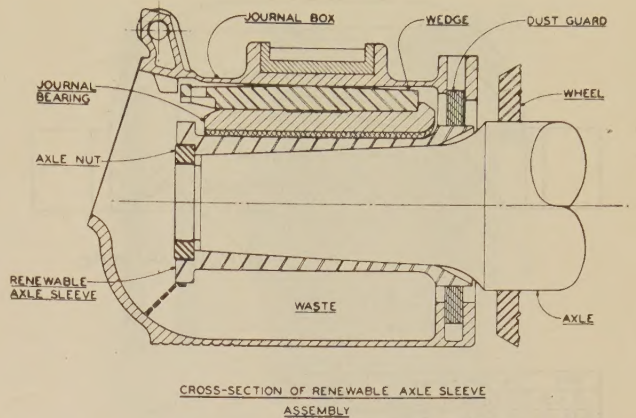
CROSS SECTION OF RENEWABLE AXLE-SLEEVE ASSEMBLY
